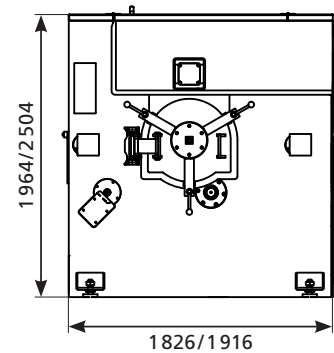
Dimensions (mm) of a SGL with moving saws, right-hand design
